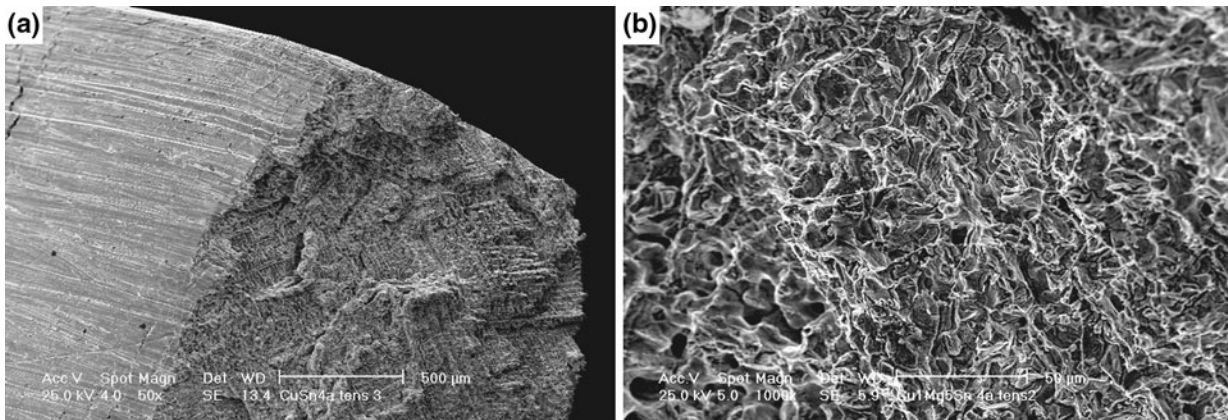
Fracture surface of a tensile sample for a Cu-1Mg-5Sn alloy showing: (a) necking zone, (b) detail showing a higher fraction of brittle fracture.
